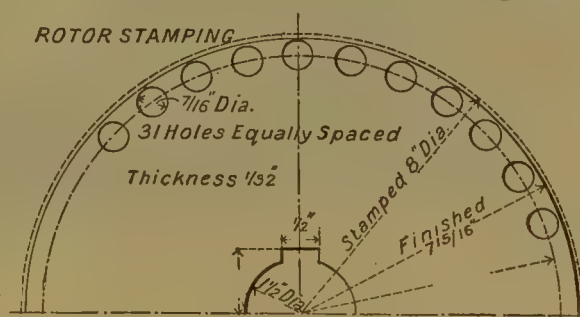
Rotor Stamping for 5 B. H. P. Induction Motor.
